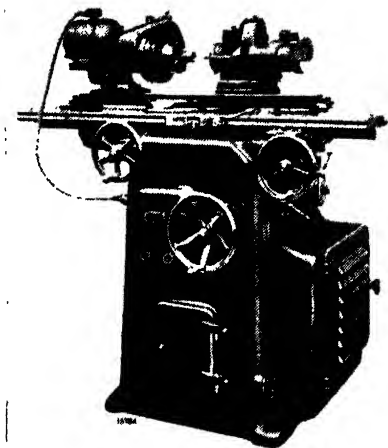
Herbert's No. 16 Motor-Driven Universal Tool and Cutter Grinder.
